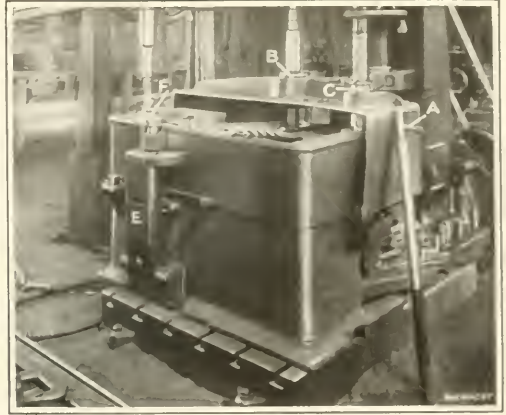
Close View of Drill Jig used on Machines shown in Fig. 7
